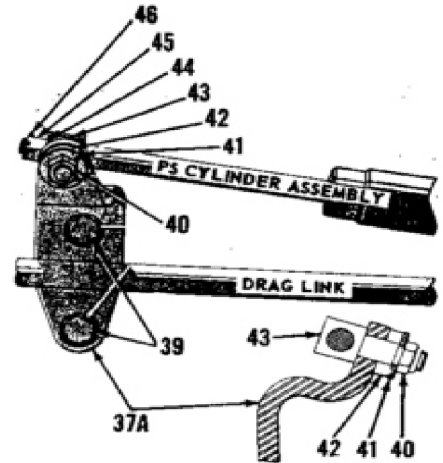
Views showing installation of latter type power steering cylinder rod mounting bracket. The above parts may be installed on early production tractors if desired.
